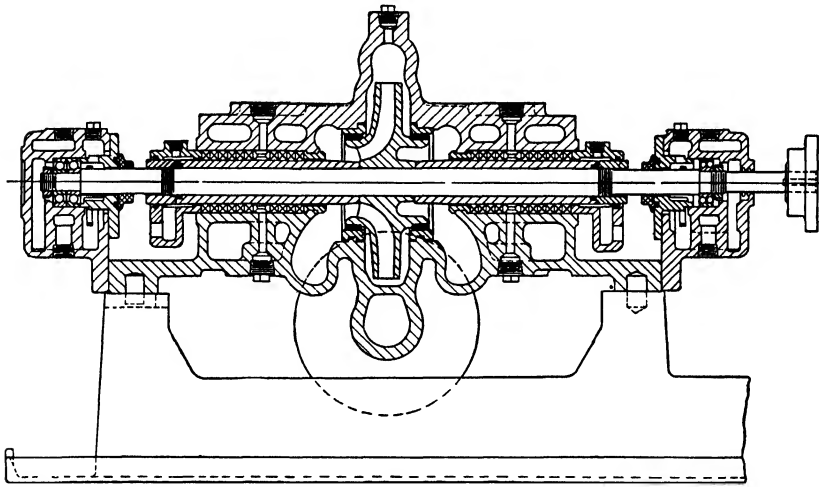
Single-suction impeller in a double-suction casing is balanced for axial thrust (Ingersoll-Rand).
